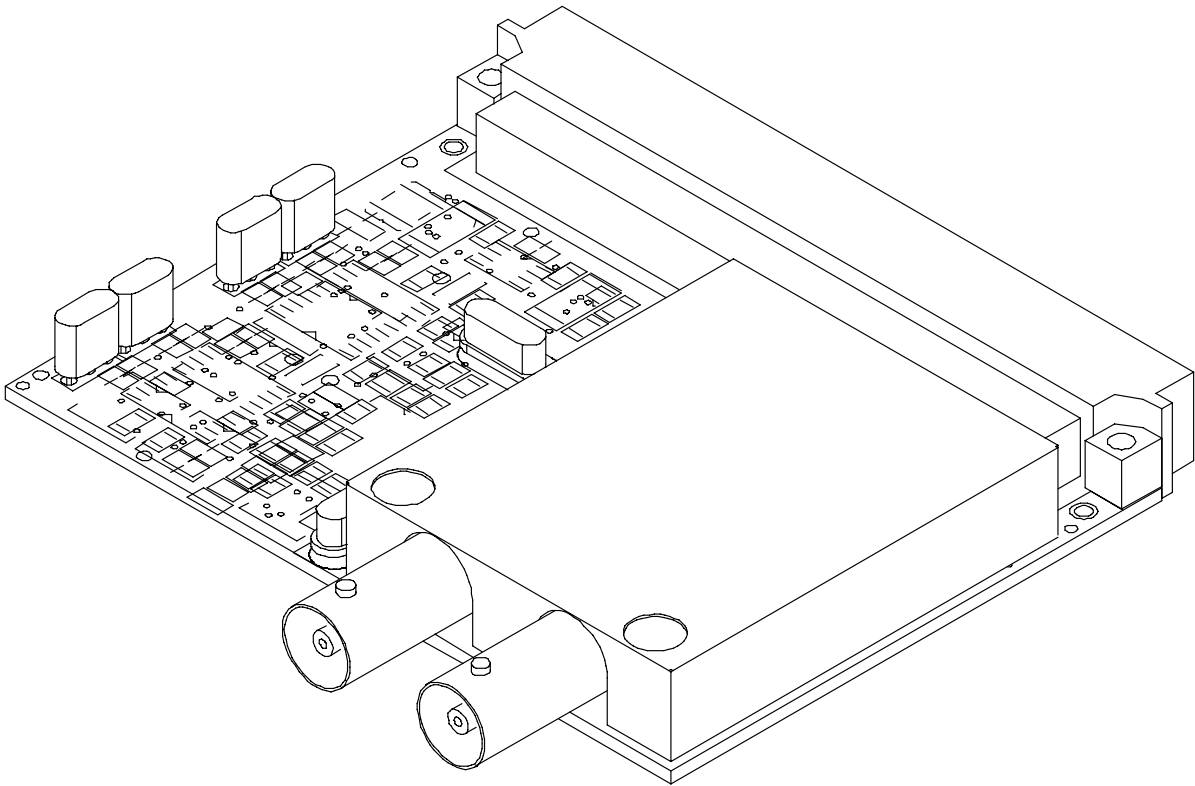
Fig C-a Mortara Receiver Module (MRM-915) Printed Circuit Board Assembly Complete Ref: 26125-001-50
